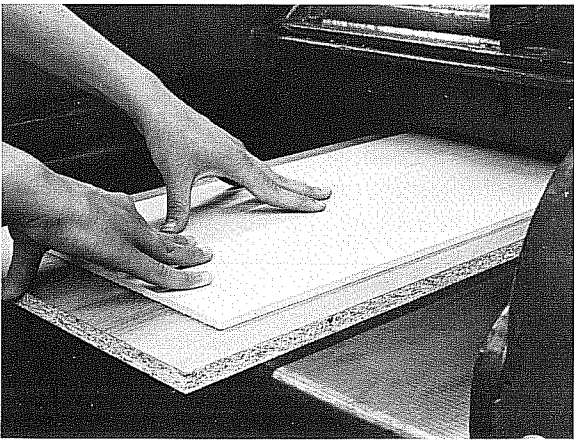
To surface stock less than 1/4 inch (6 mm) thick, place it on a backing board. The backing board must be of uniform thickness. It must also be longer and wider than the stock.
